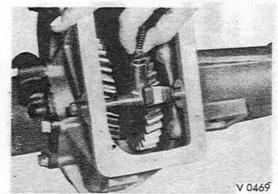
Installing the gear shift fork lock ball and spring in the high & low fork.
